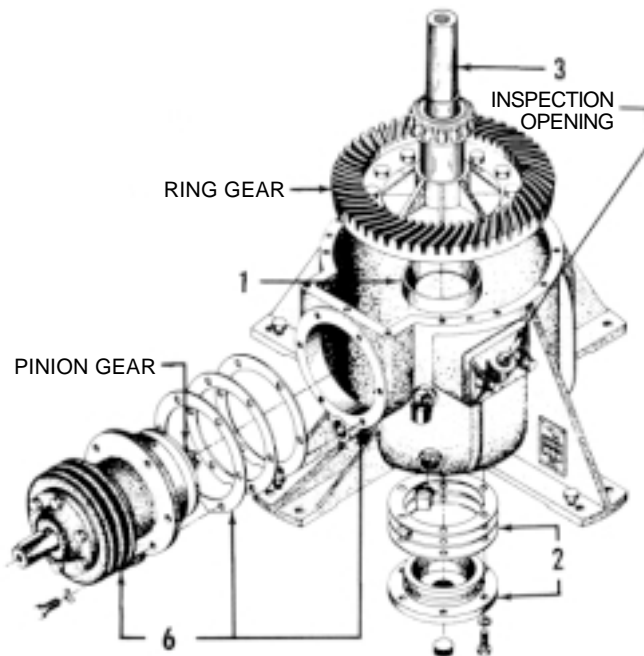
Installation of Fan Shaft and Pinion Cage Subassemblies
